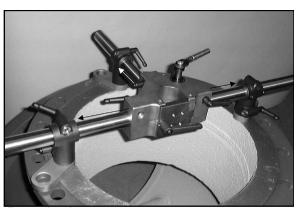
ALIGNMENT OF THE UNIVERSAL CLAMPING DEVICE
